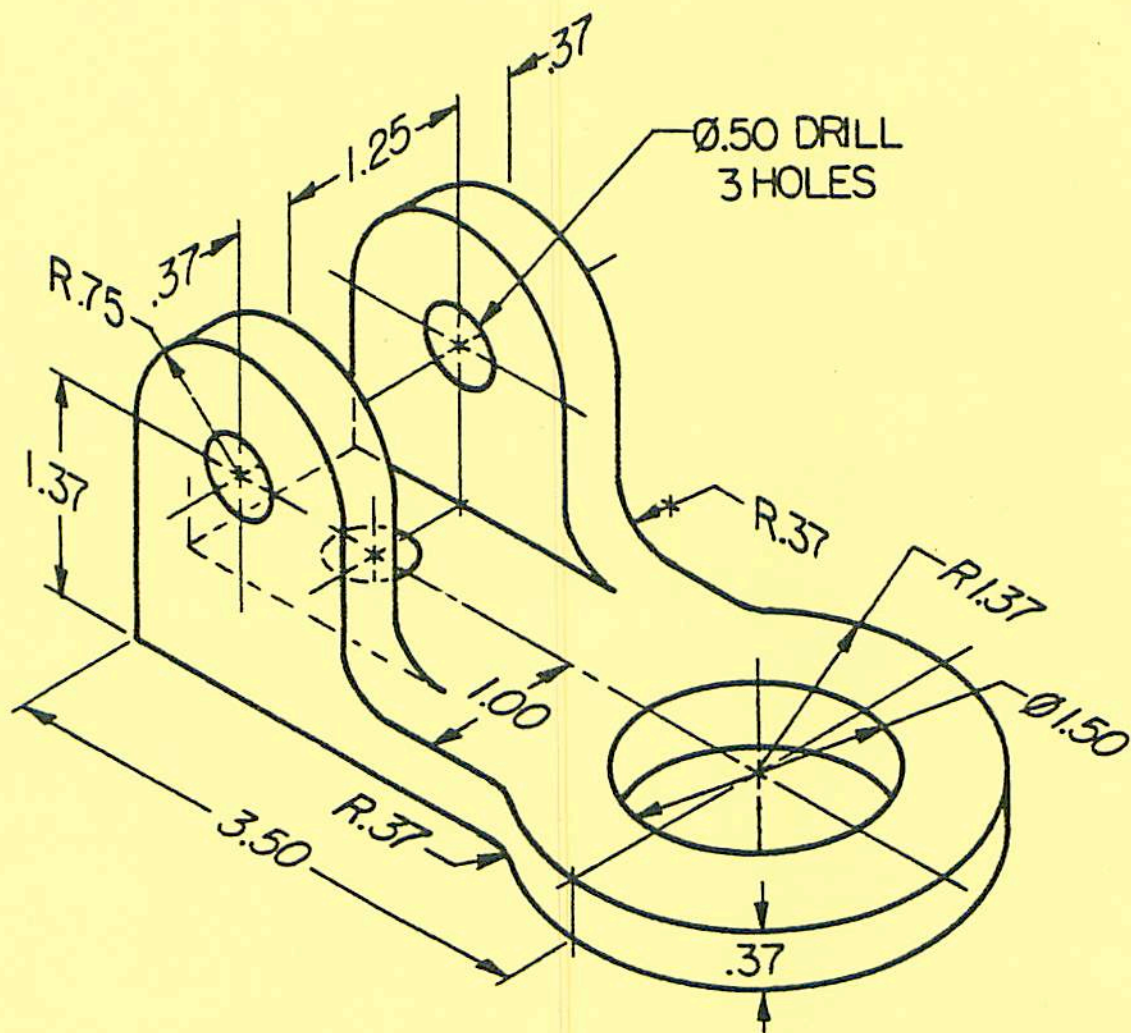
Actuator base. Using Layout C in the Appendix, draw necessary views with instruments.
